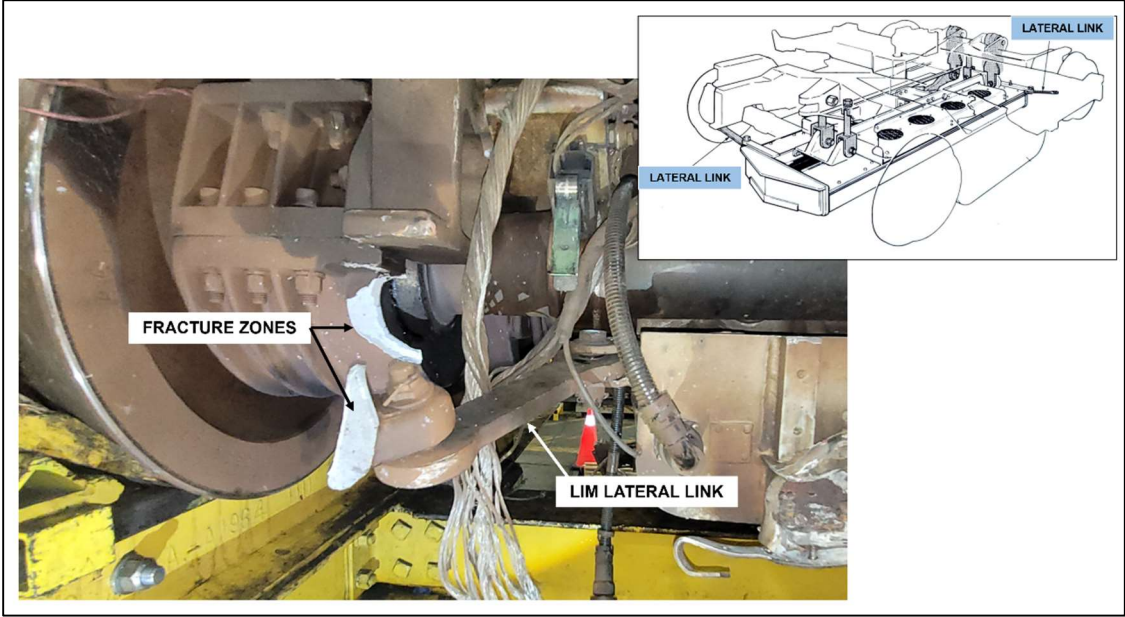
Fractured Journal Box (LIM Lateral Link Attachment)
